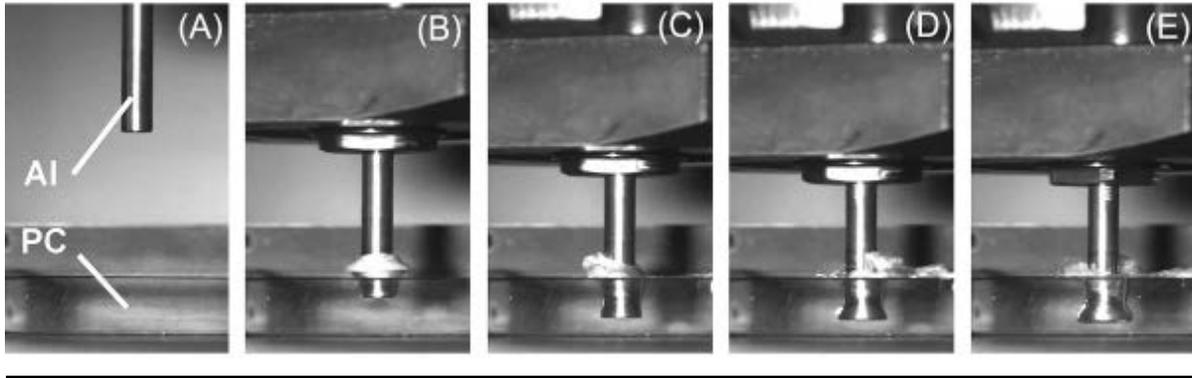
Friction riveting process scheme as illustrated for metallic insert-type joints. (A) Positioning and clamping of joining partners. (B) Rotational insertion of metallic rivet into the polymeric plate (C) Rotational braking followed by (D) rivet forging. (E) Cooling and joint consolidation.
